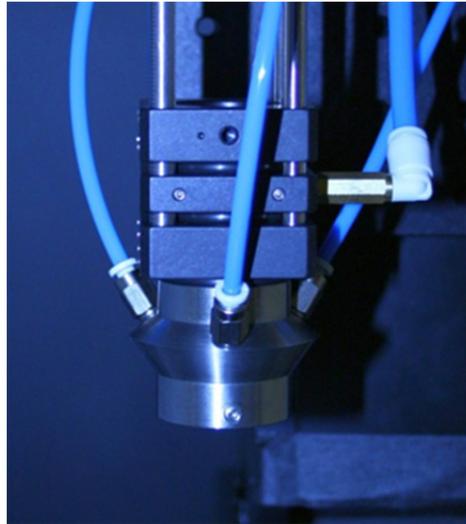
Additive processing head for laser metal deposition: Coaxial powder nozzle, inlets for powder, carrier gas and shielding gas and focusing optics.
